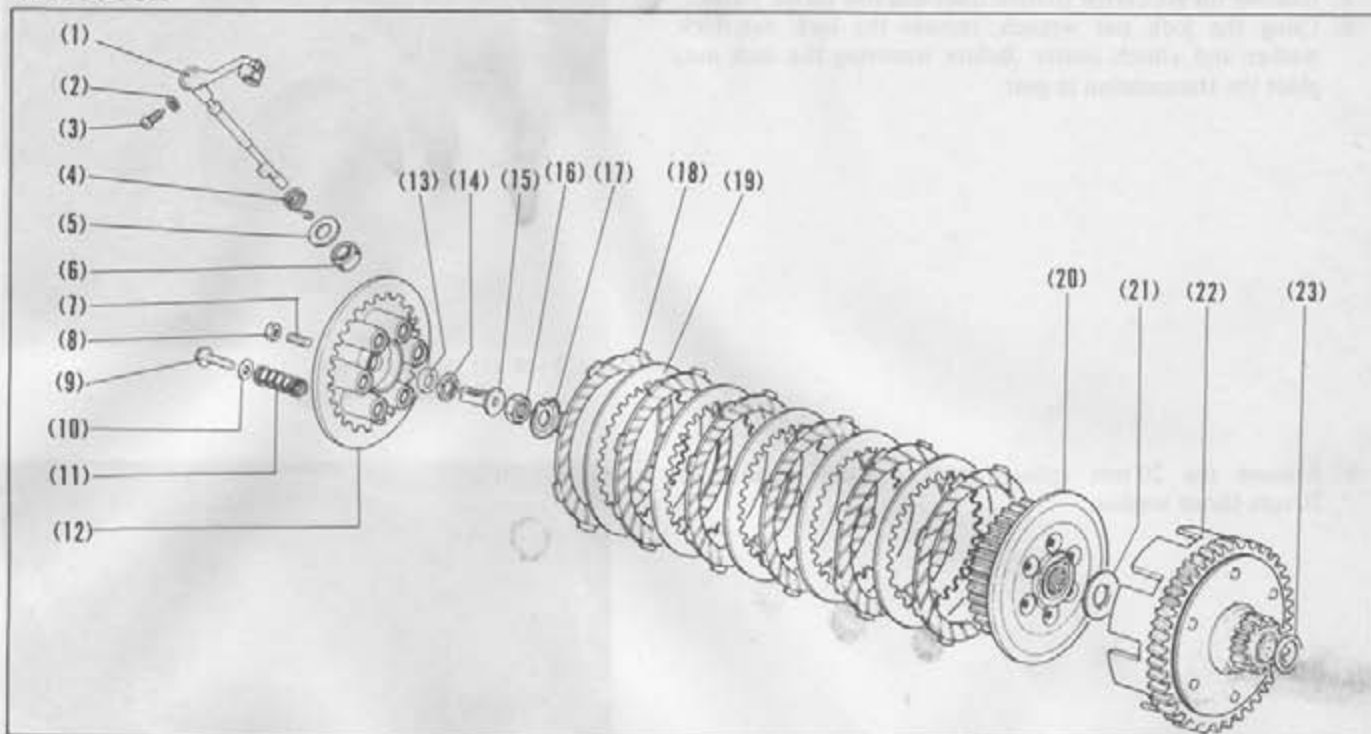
(1) Clutch lever (7) Clutch adjust screw (13) 12.5 mm thrust washer (19) Clutch plate (five)
